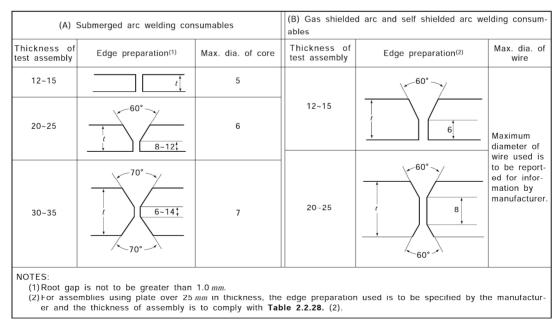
Edge Preparation of Butt Weld Test Assembly with Two-run Technique (t: plate thickness, Unit: mm)
